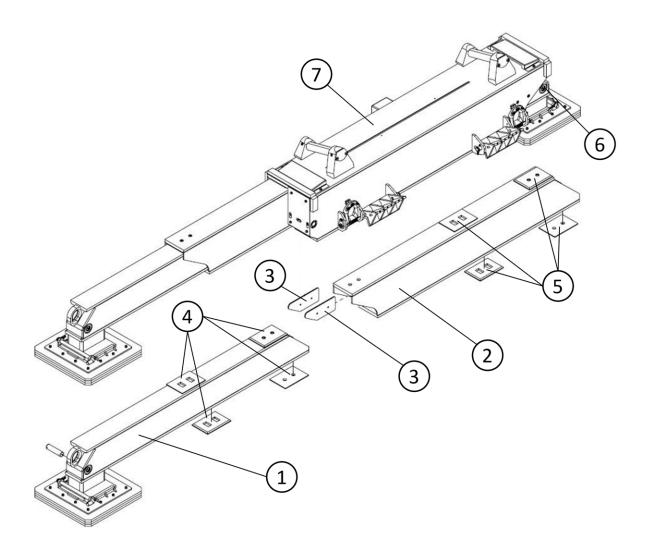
DISASSEMBLING THE OUTRIGGER (CSR85)
